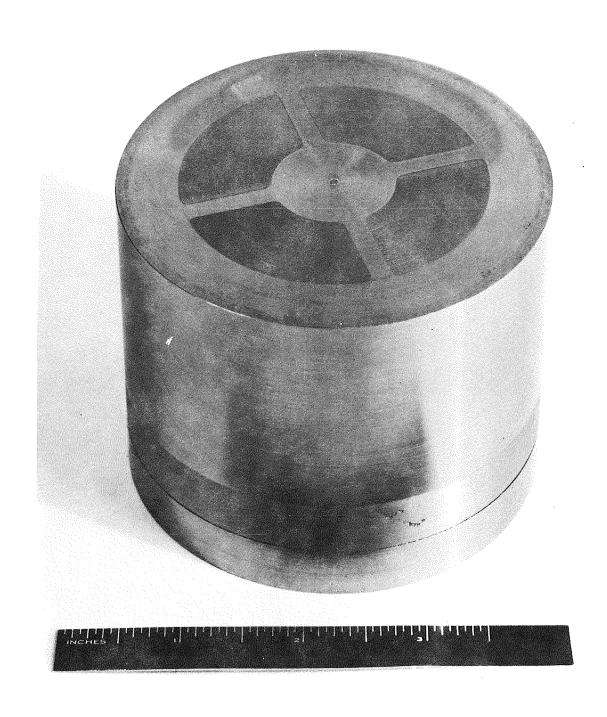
Test Sample After Clean Up Machining - Eye and Discharge View
